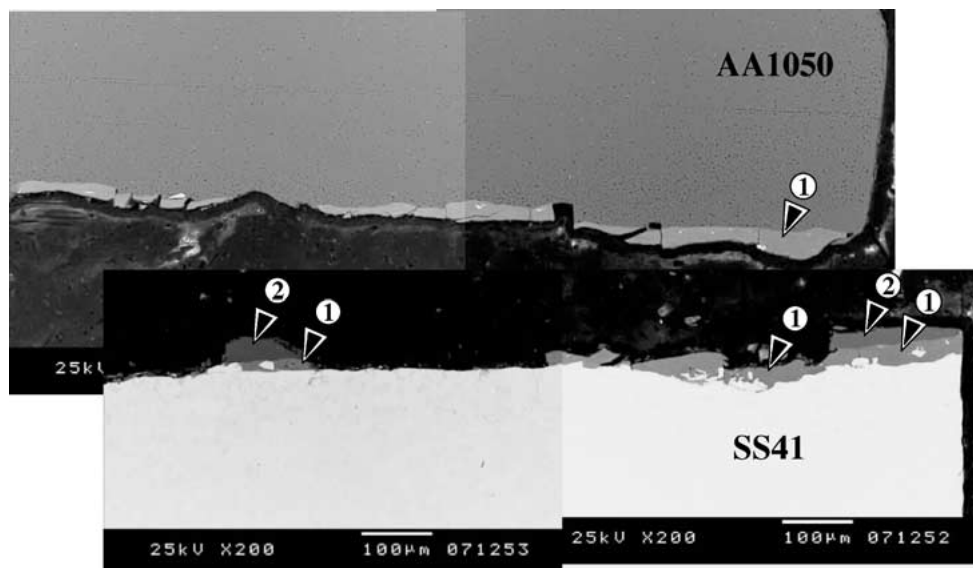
A side view (BE image) of the fractured specimen with 1.0 mm-thick interlayer showing the route of crack propagation. The upper AA1050 part is matched with a lower SS41 steel part at the fracture surface. The right edge of AA1050 part was disappeared after test. The label 1 and 2 are interfacial zone (FeAl_3) and AA1050, respectively.
